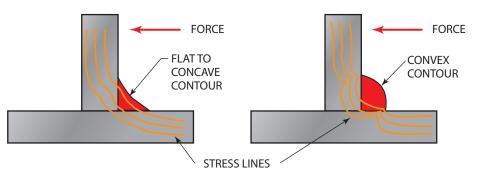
The stresses are distributed more uniformly through a flat or concave fillet weld.
